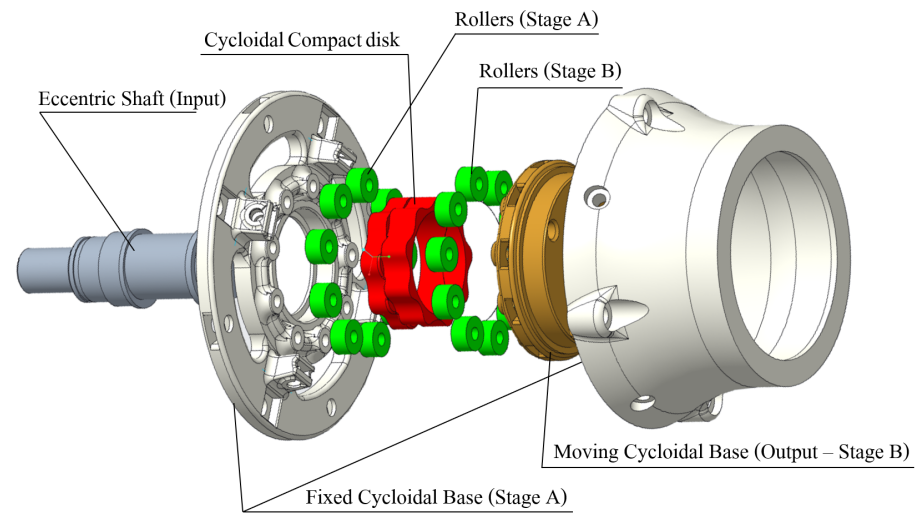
Exploded view of the CAD model of the cycloidal (CY30) reducer. Bearings, nuts, and screws were hidden for better comprehensibility of the Figure. The distinct elements illustrated with the same color (the upper and lower parts of the fixed cycloidal base, as well as the two parts of the cycloidal carrier) are rigidly connected through screws in the final assembly.
